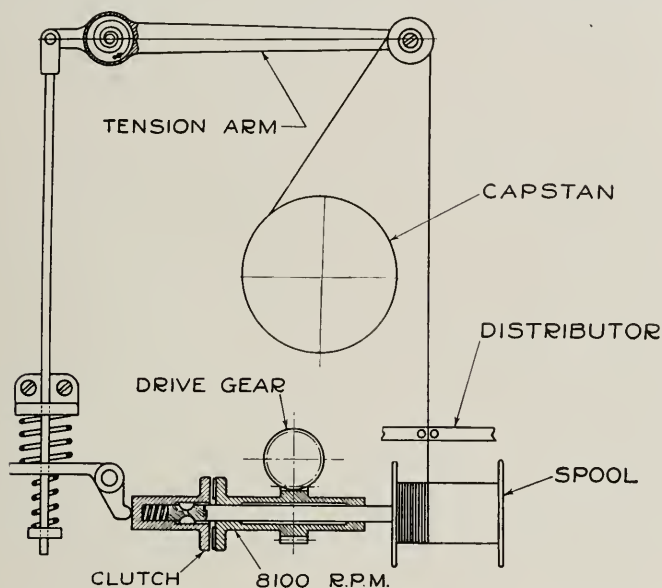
Automatic tension mechanism—No. 3 wire drawing machine
